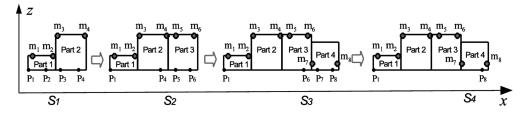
Assembly sequence, locating, and measurement points in Example 2
